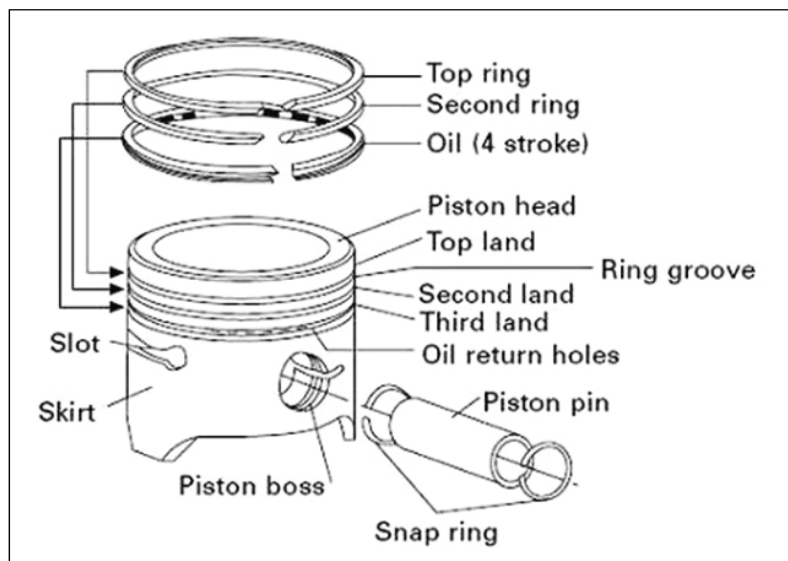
Sketch of a piston employed in a four stroke combustion engine.
